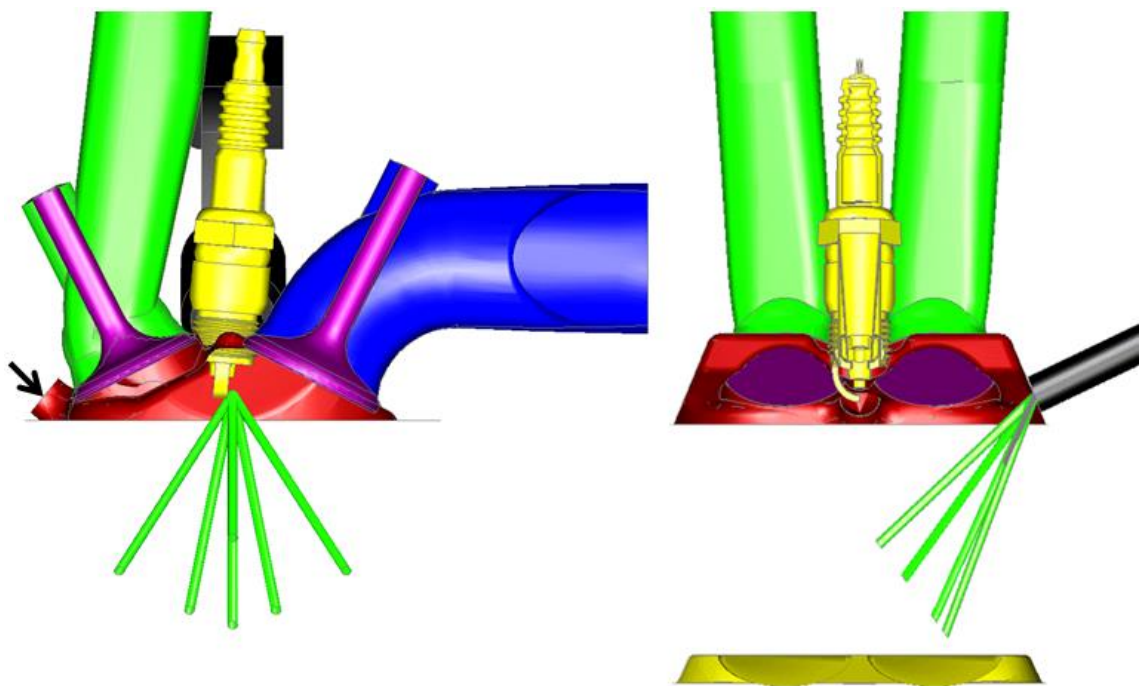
Combustion chamber, and intake and exhaust ports, and direct injection spray details.
